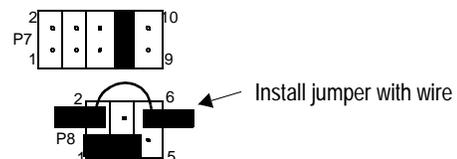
Jumper-Pin Connector Blocks for Alternate Installation
